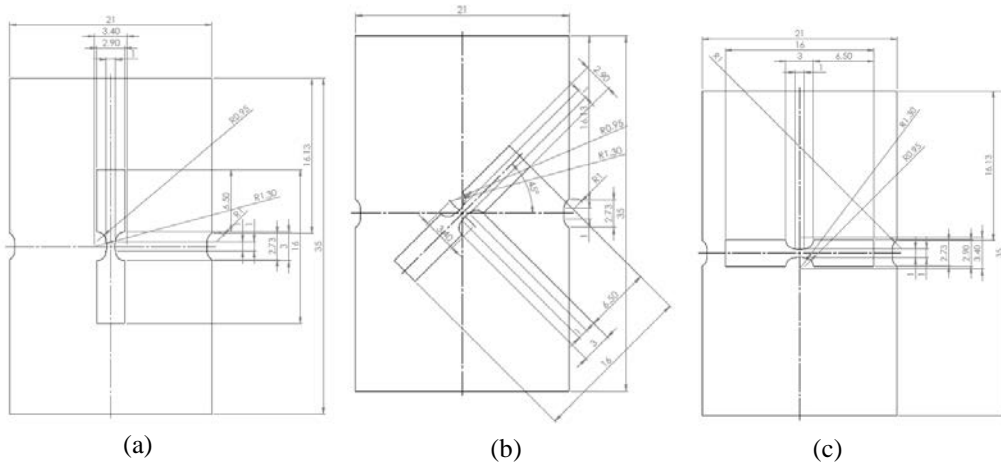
The drawing of the uniaxial tensile specimen which is (a) 0°, (b) 45° and (c) 90° to the pre-strained direction after pre-strained.
